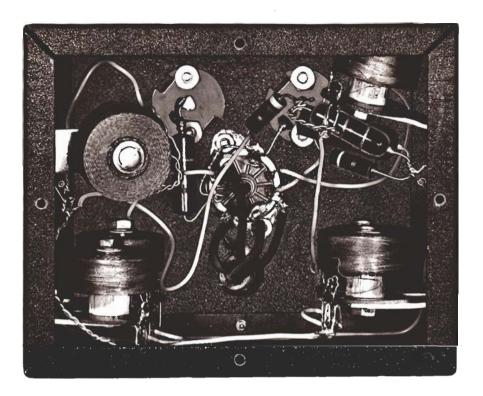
Bottom view of filter showing socket placed with pins 1 and 9 toward phono jacks. Solder lugs under coil bracket mounting screws are used as ground tie-points for C_1 , C_2 and C_3 .
